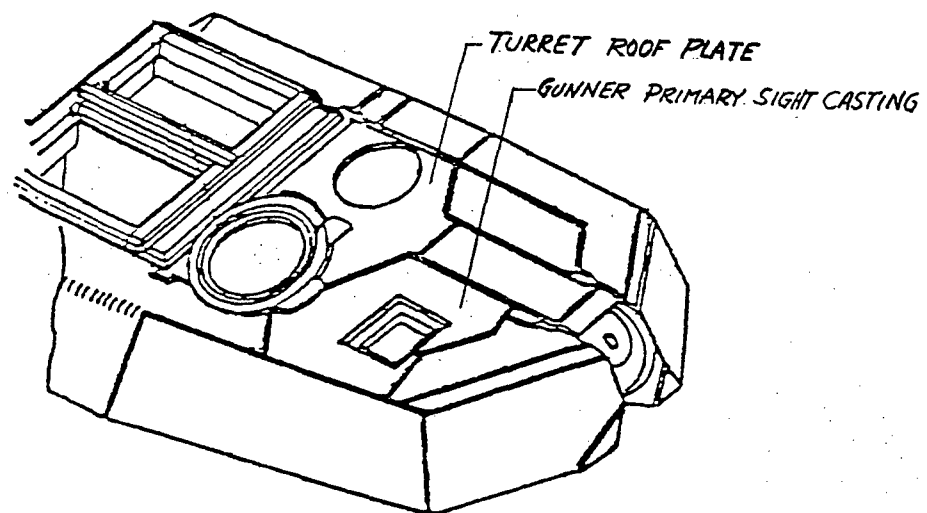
M1A1 Welding Isometric Turret Structure; Outer Roof
